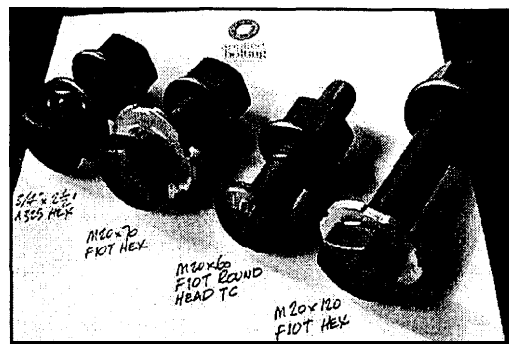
3/4" A325 Bolts, M20 F10T Bolts
